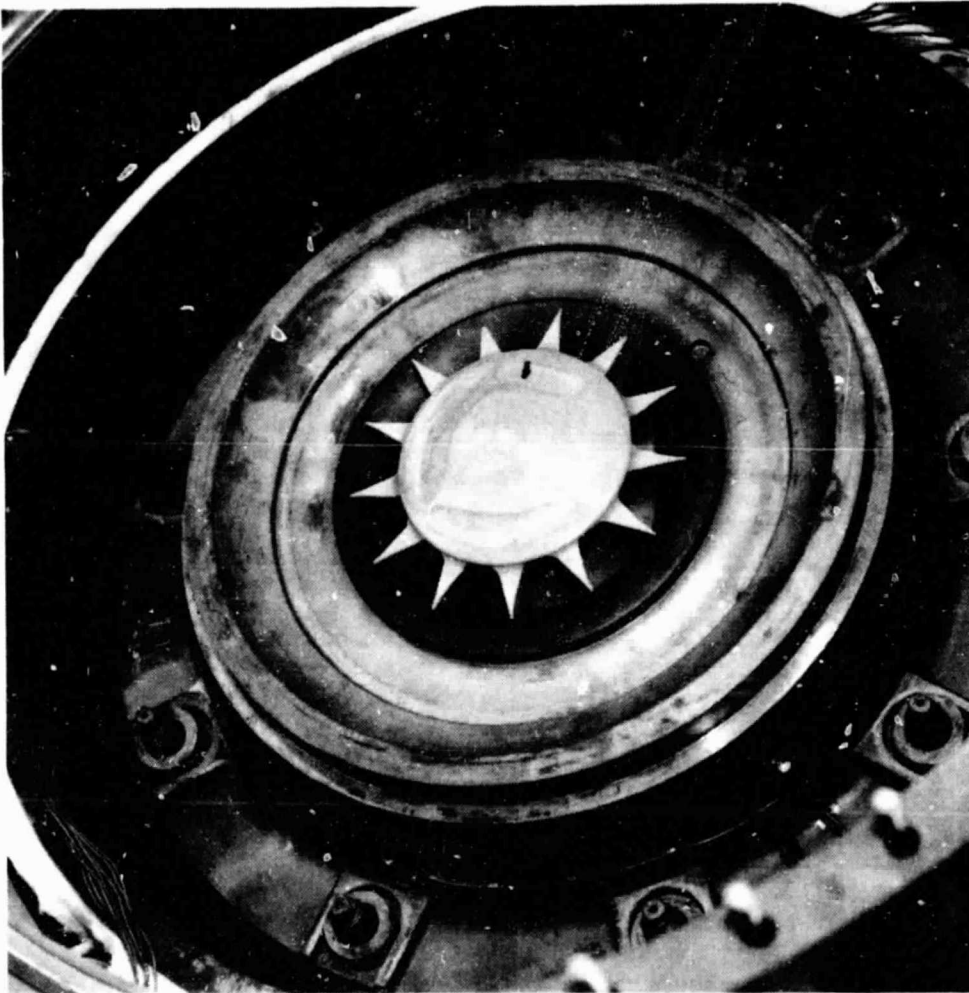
Ceramic Rotor in Metal Engine, Build 24.
